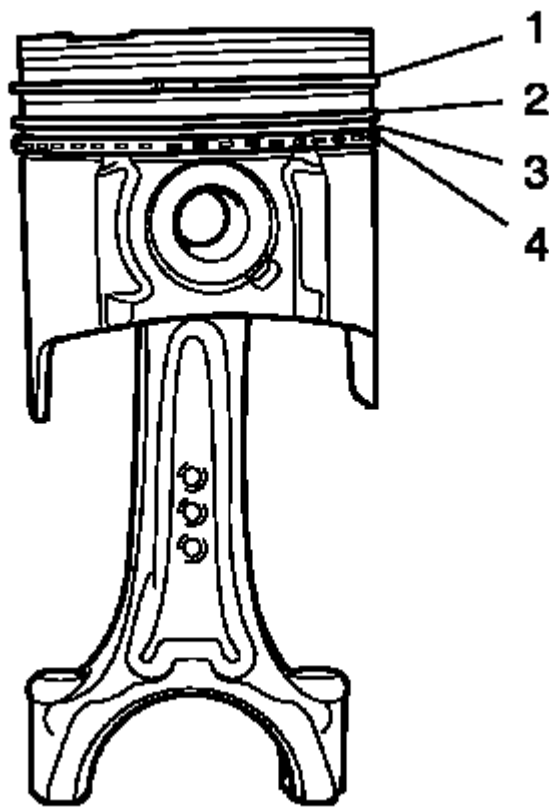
Upper Compression Ring, Lower Compression Ring, Oil Rings And Oil Ring Spacer
